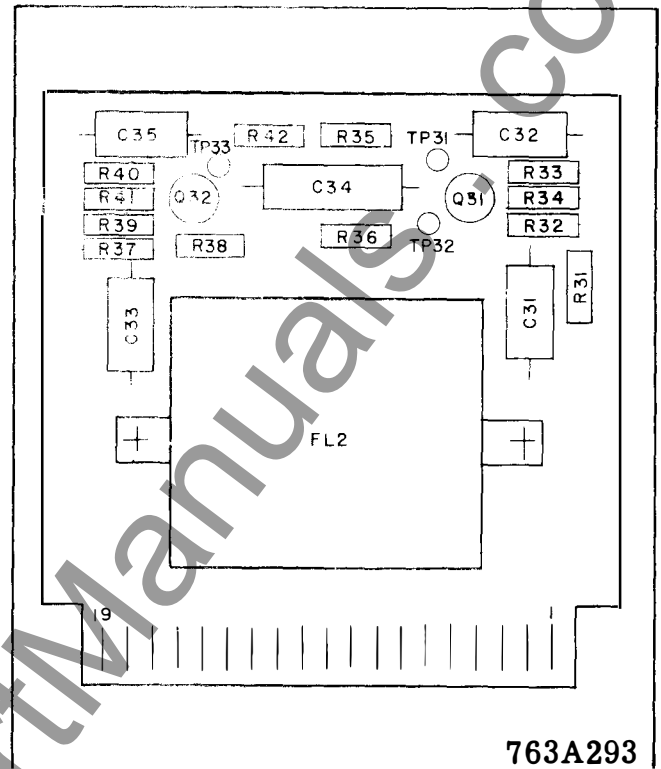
Component locations on the I.F. amplifier printed circuit board.
